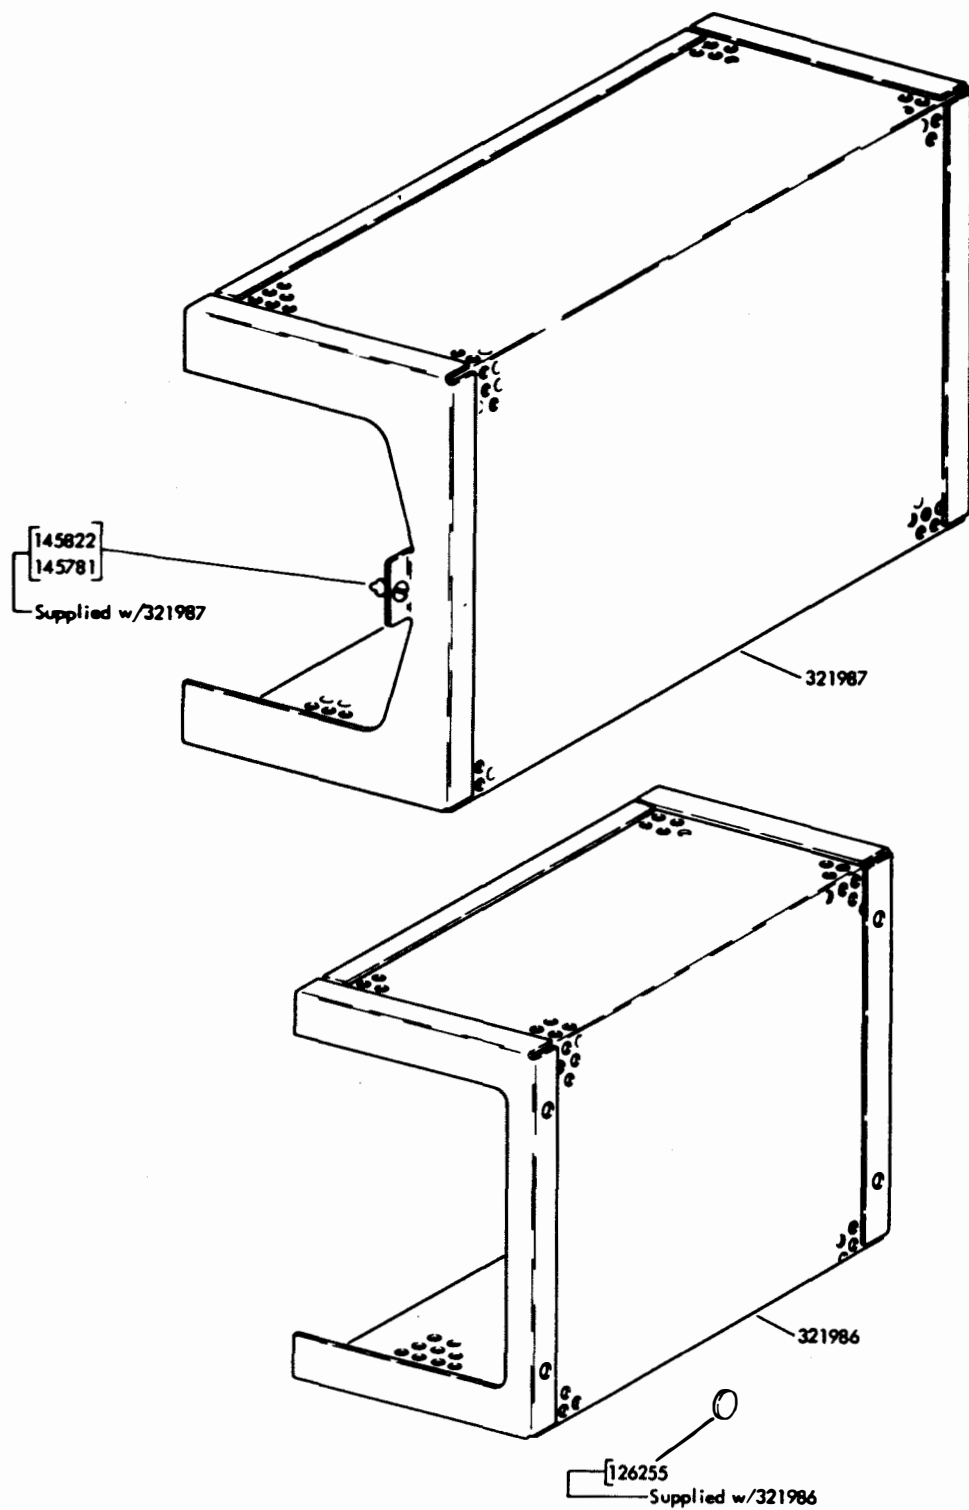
Electrical Service Assembly Covers (Sheet 1 of 2)
